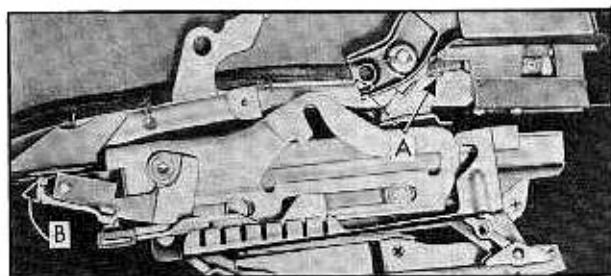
Detaching Seat Assembly from Adjusters (Coupes)
